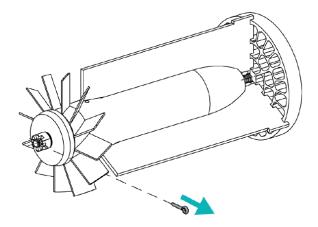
BEARING ASSEMBLY RETAINING RINGS REMOVAL
